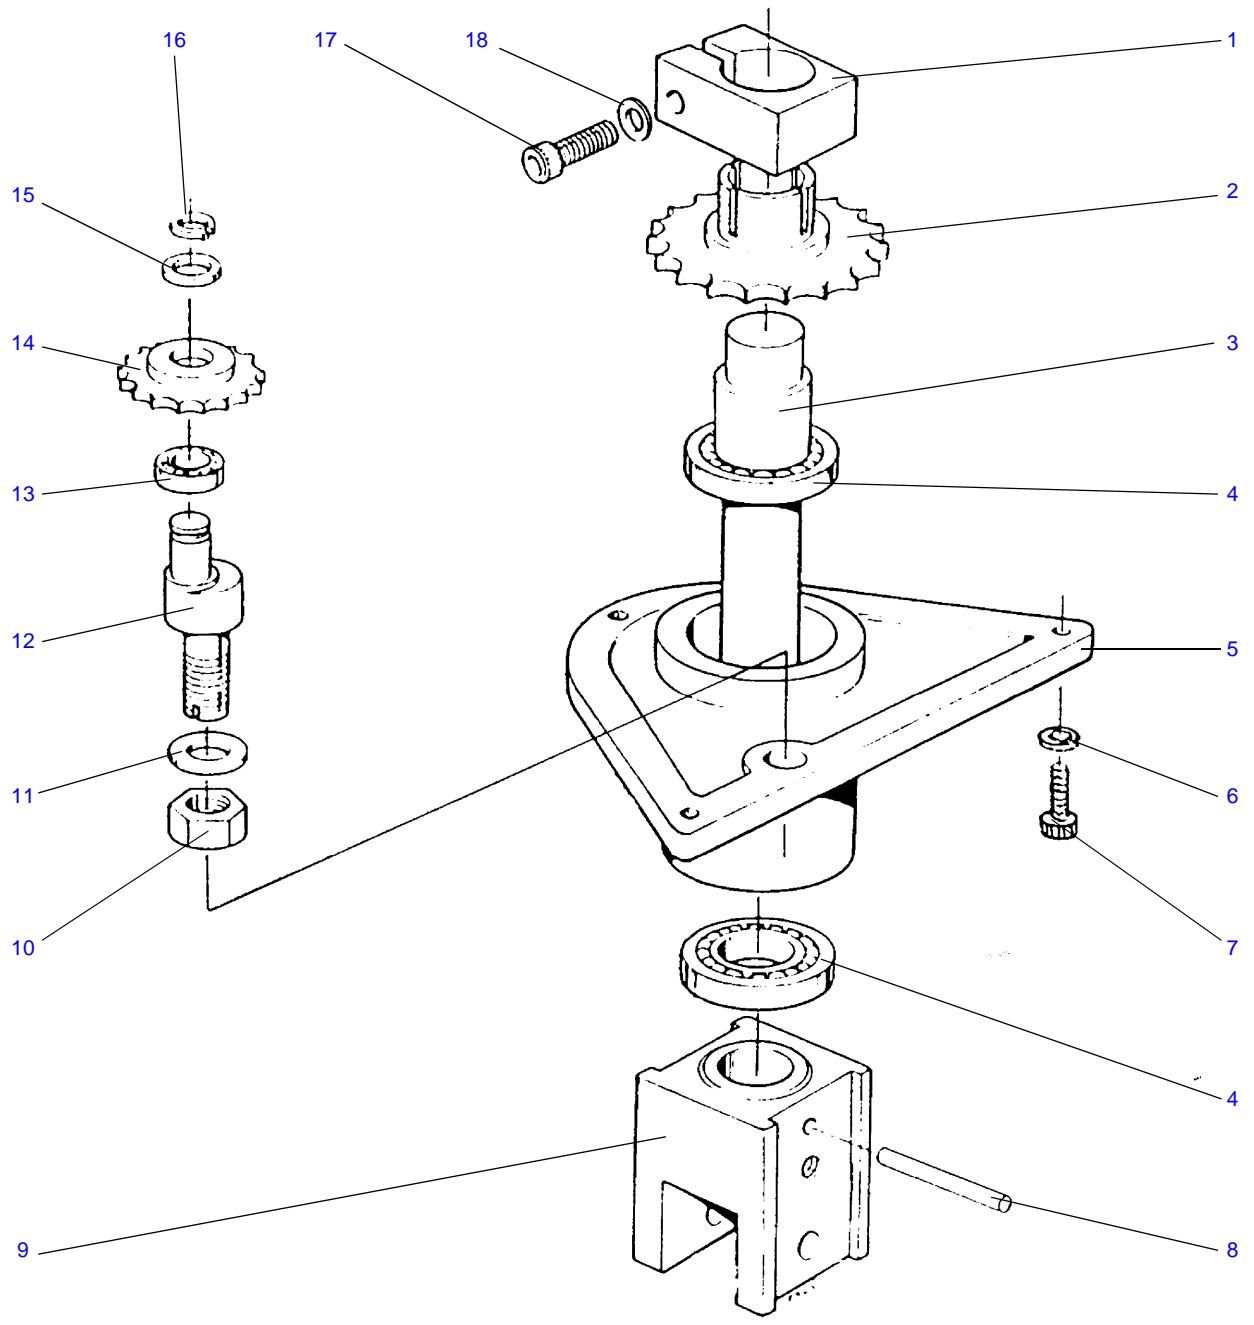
Tern Pedestal - Wheel Housing Assembly (Fixed) (3741-11)
